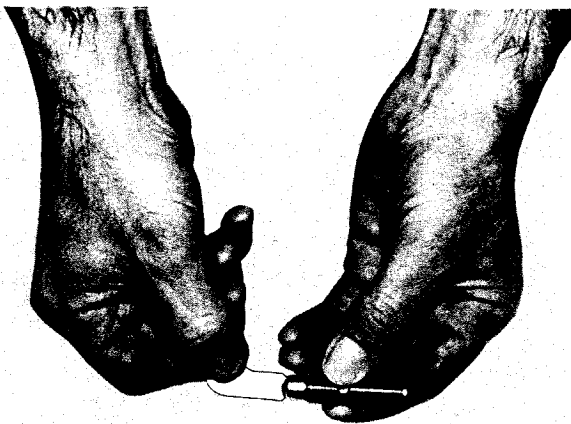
, (N20305). Checking rocker lever adjusting screw ball end
